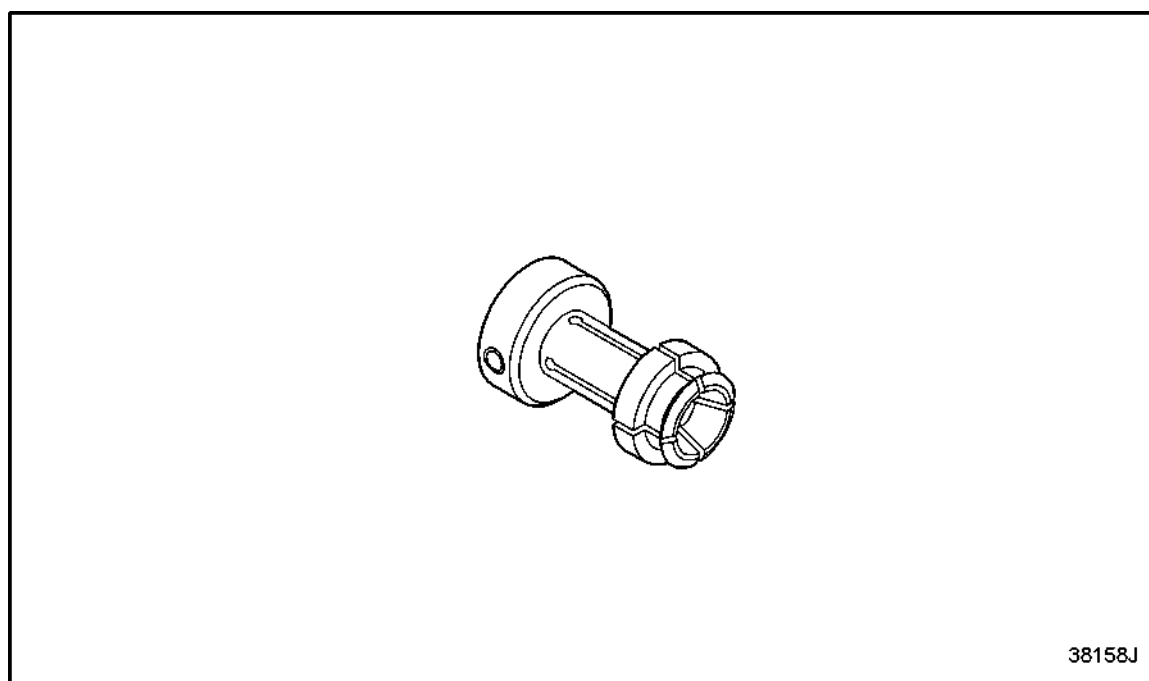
Valve Seat Insert Remover Collet,J 23479-33
